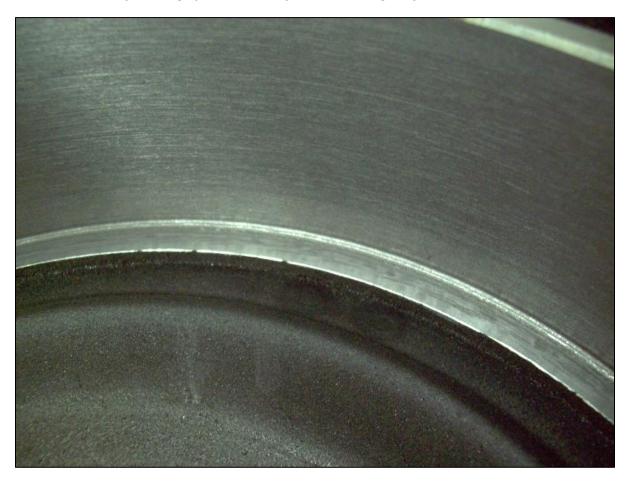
I like to position the cutter ALL THE WAY down into the inner corner and slightly remove some additional metal for added clearance for the brake shoes.
